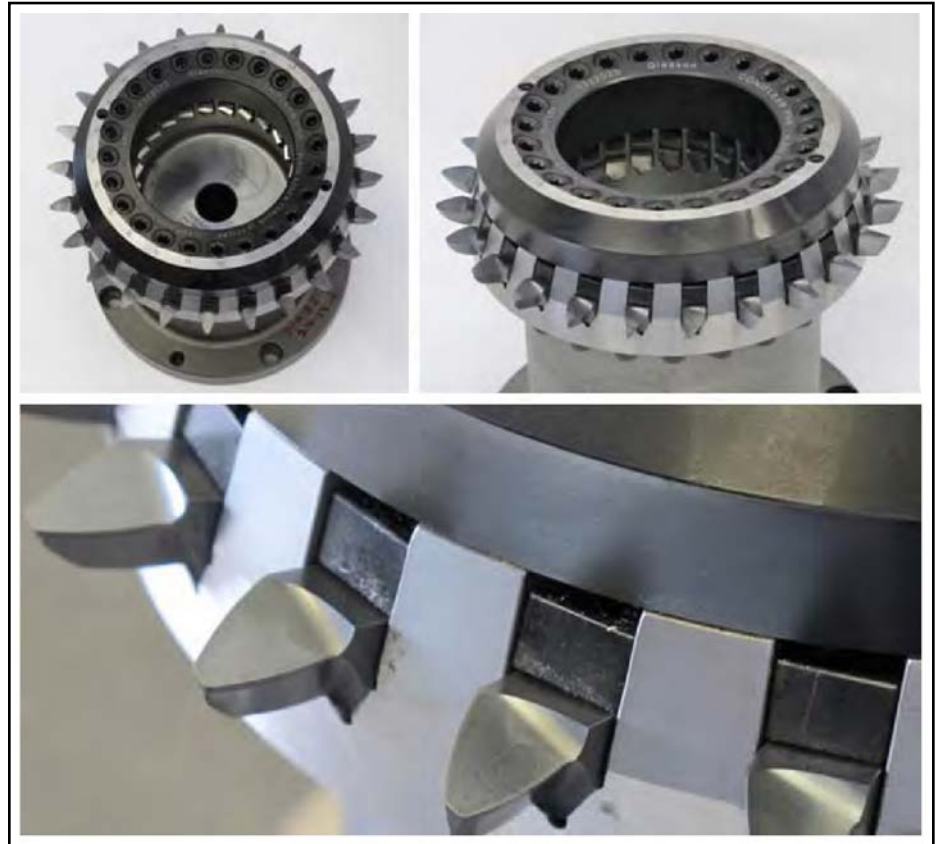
Stick blade cutter PentacPS for power skiving with carbide blades.
